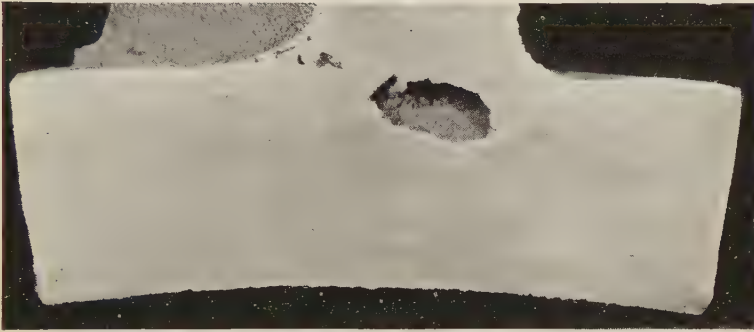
Fan Blade, sectioned to reveal defect shown in Fig. 35. $\times \frac{2}{3}$.
